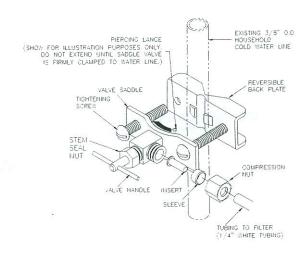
A Saddle Tapping Valve Assembly P/N 34900001 installed on 3/8" O.D. Tubing
